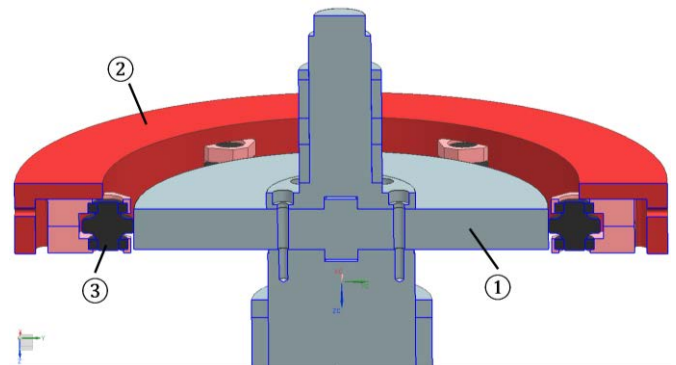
Cross-section of substitute rotor and proposed planetary BB. ①: Rotor; ②: Stator of planetary BB set; ③: RRD with rolling element Bearing inside a slidable mount
